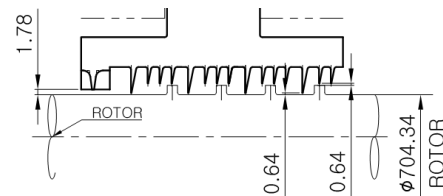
Geometry of labyrinth seal (unit : mm) (Ref. (12))
